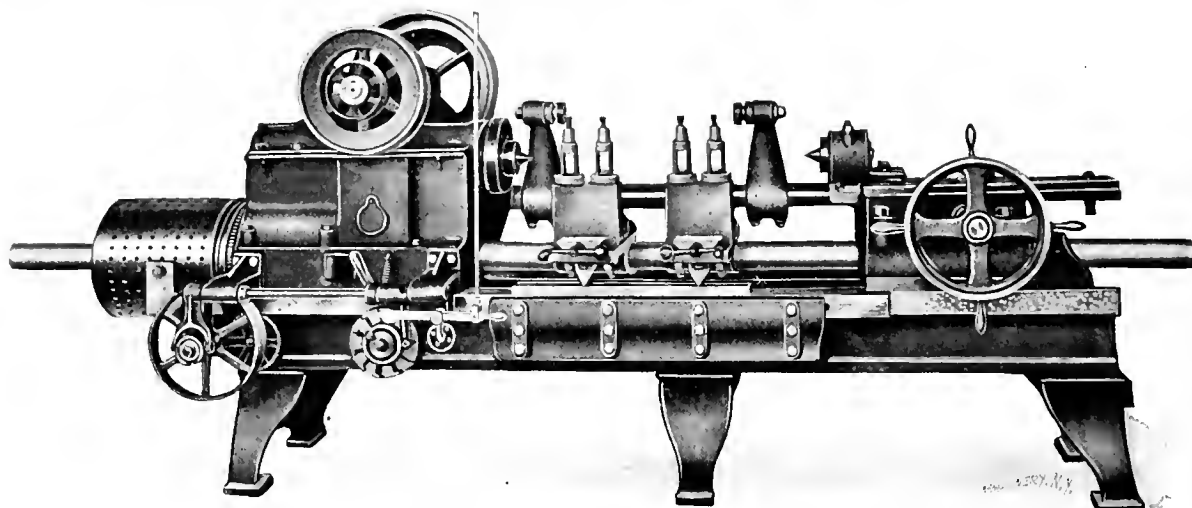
An Automatic Lathe for Turning Pulleys, Gear Blanks, etc., on Centers
